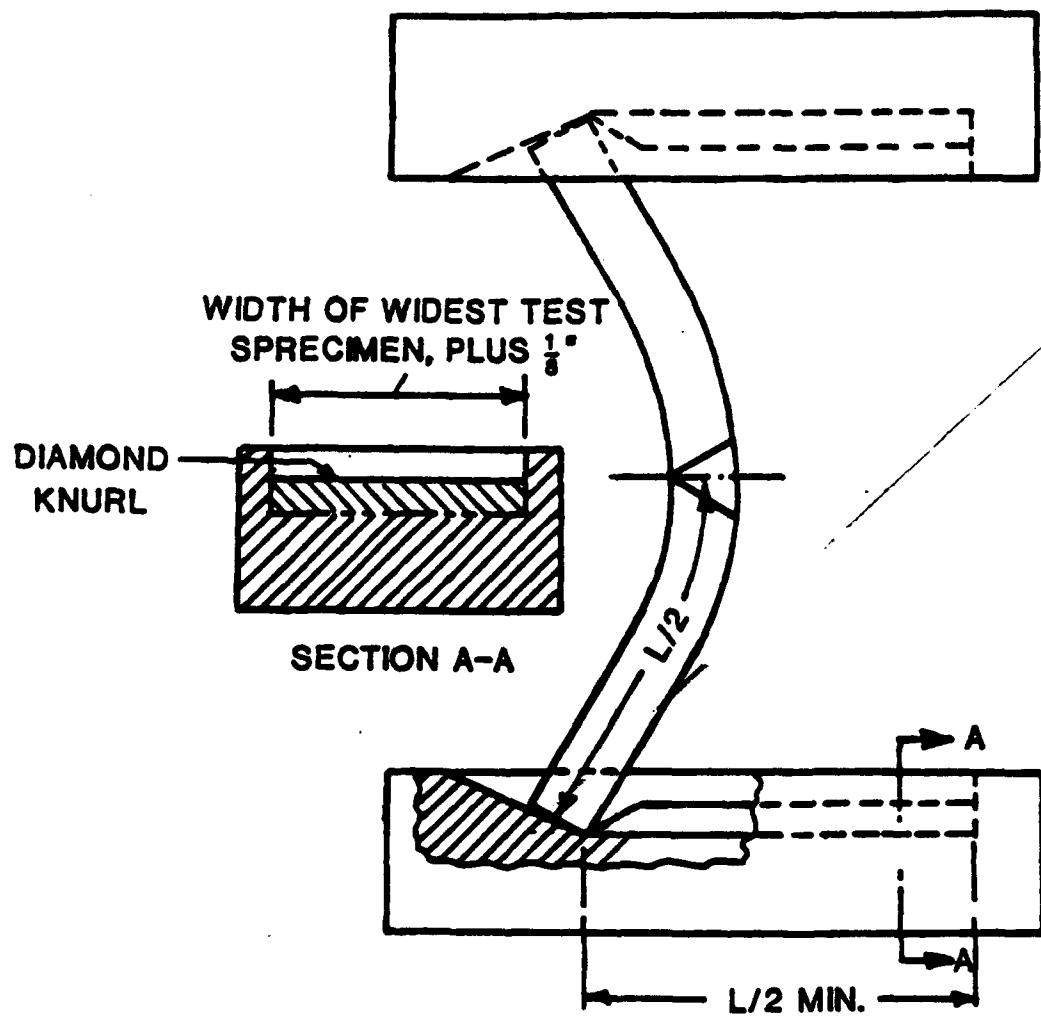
Schematic of free bend test apparatus showing final bend fixturing.
